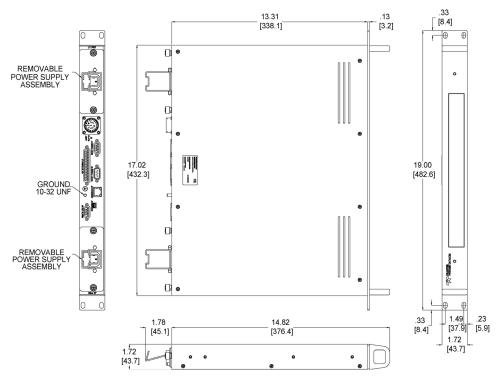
Outline Drawing, Typical Redundant System Controller Unit
